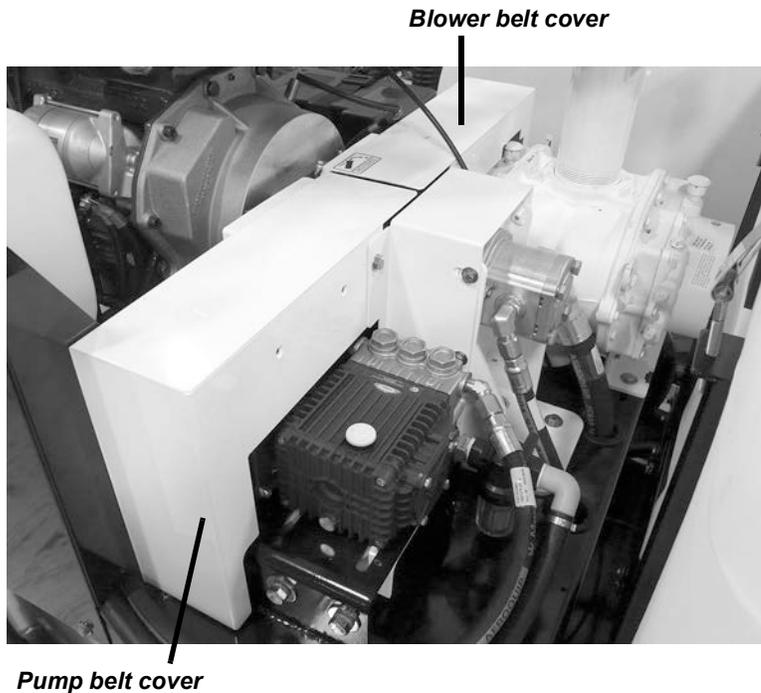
Remove the screws securing the pump belt cover to take the cover off and access the belts.
